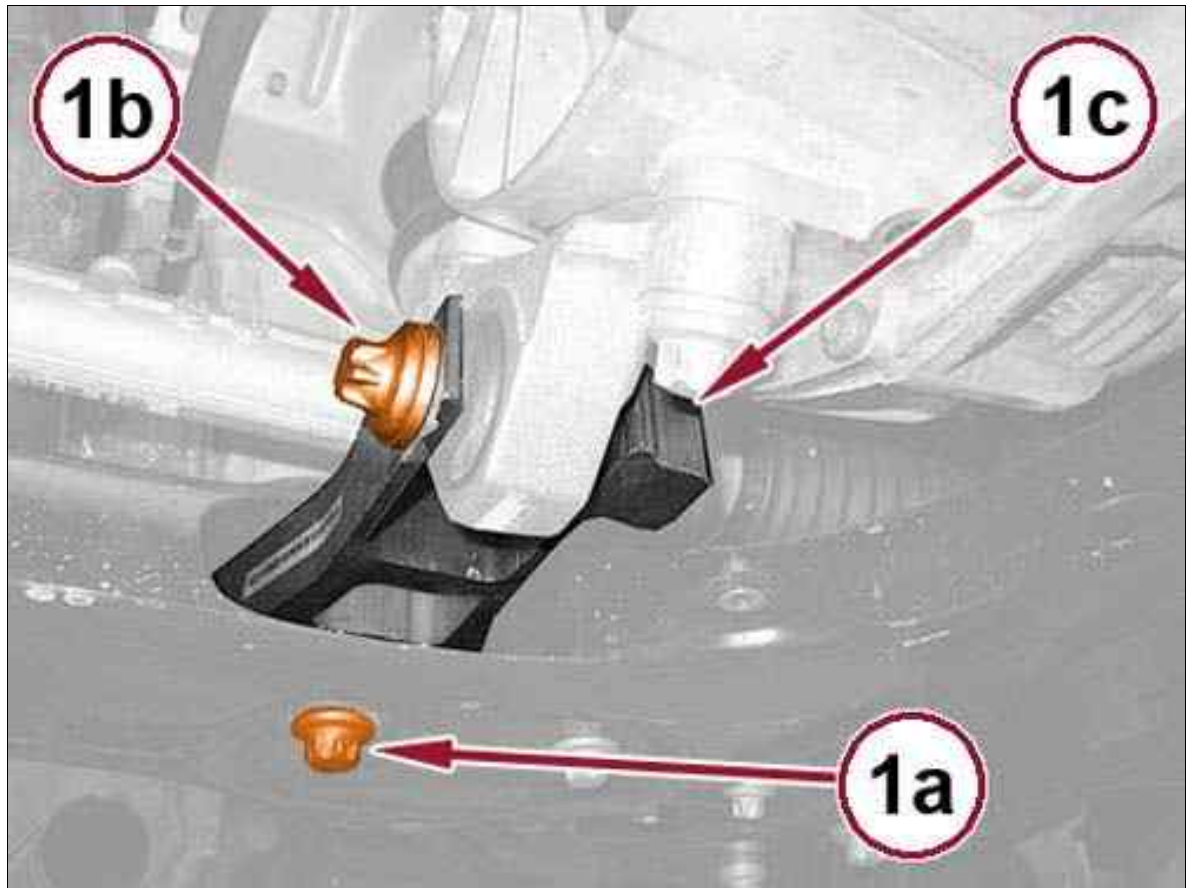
Exhaust Pipe Hanger Bolts, Exhaust Pipe Support Bracket Bolt & Exhaust Flange Nuts
